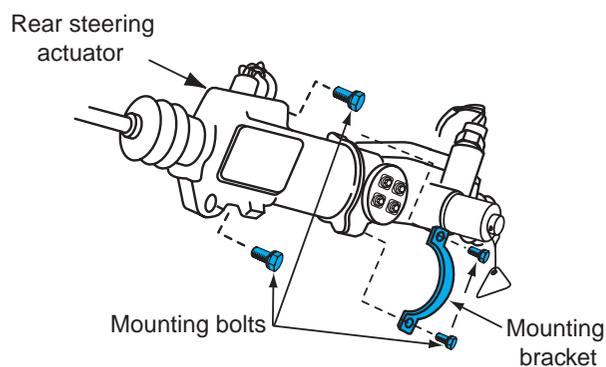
Installing the rear steering actuator, mounting screws, and bracket.
